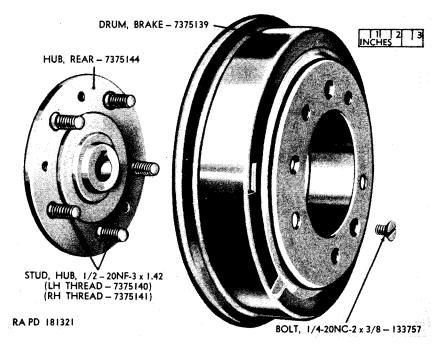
Rear wheel hub and brakedrum-disassembled view.
